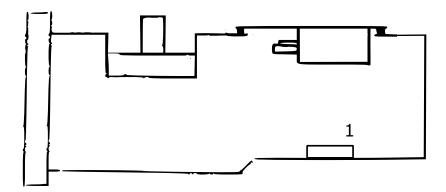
Implementation of a possible security mechanism in the handle. The sensor should detect when the operator touches the handle.
